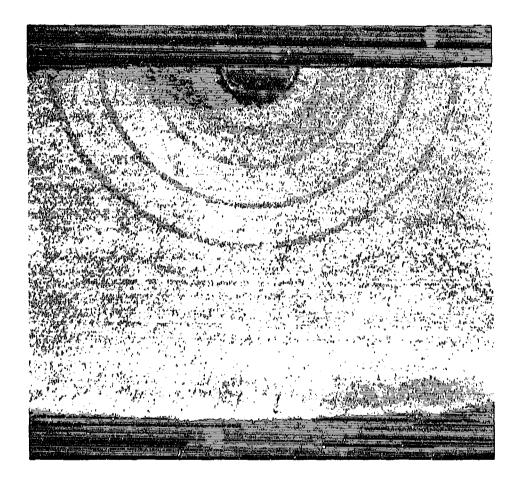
Fracture Face on a PTC Specimen (B=.46") Used in a Da/dN Test Showing Crack Front Marking Bands.
